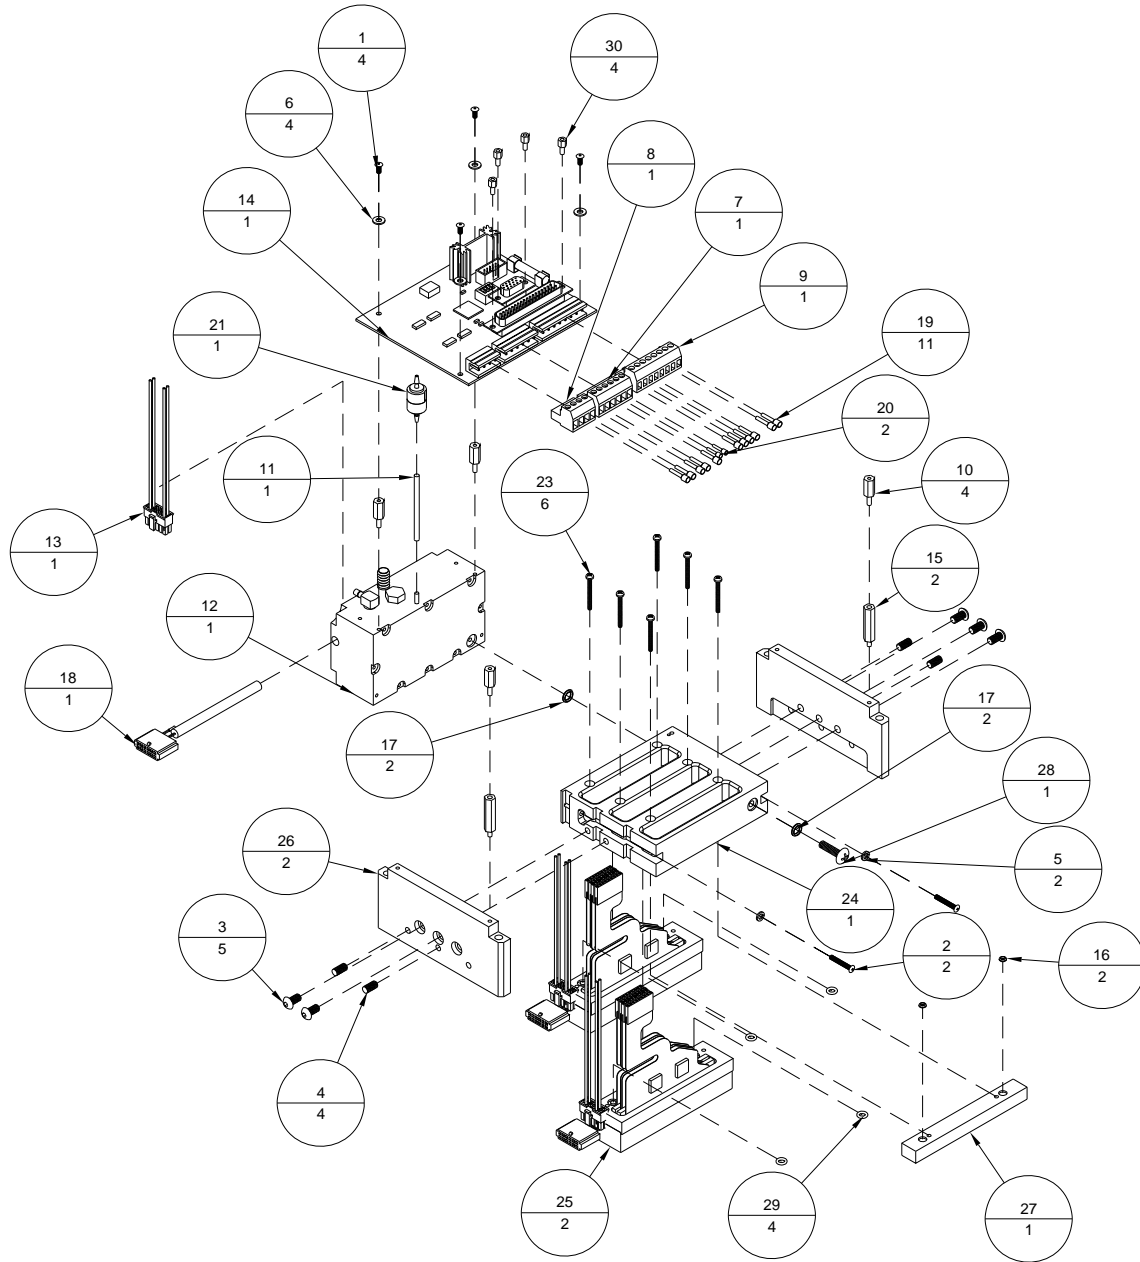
9103986A – Adjustable Manifold Assembly, 2”
